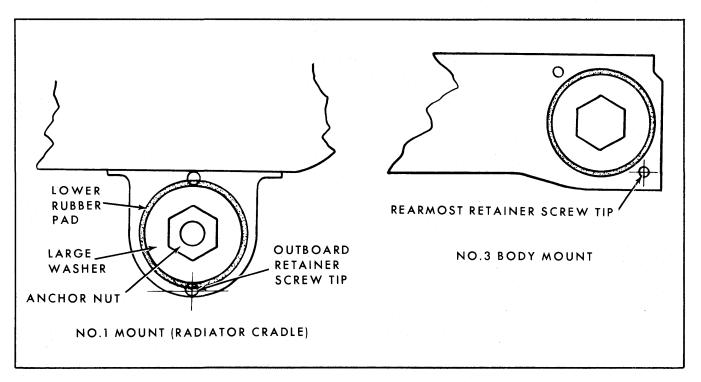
No. 1 Mount (Radiator Cradle) and No. 3 Body Mount
